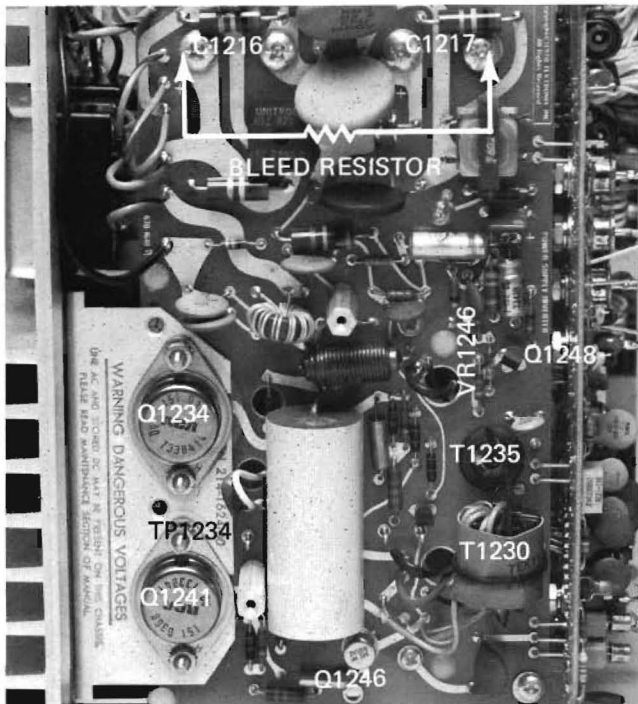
Partial view of the inverter board showing where to apply bleeder resistor to discharge C1216 and C1217.
